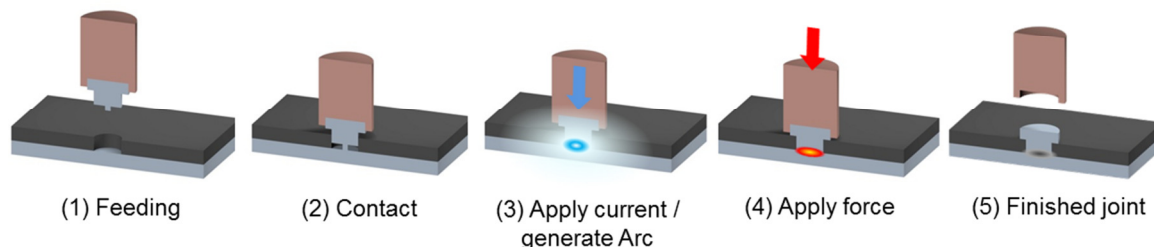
Process principle of arc element welding with an auxiliary joining part (Source : SLV)
